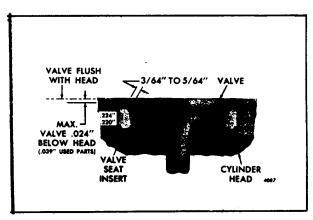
Relationship Between Exhaust Valve, Insert and Cylinder Head
